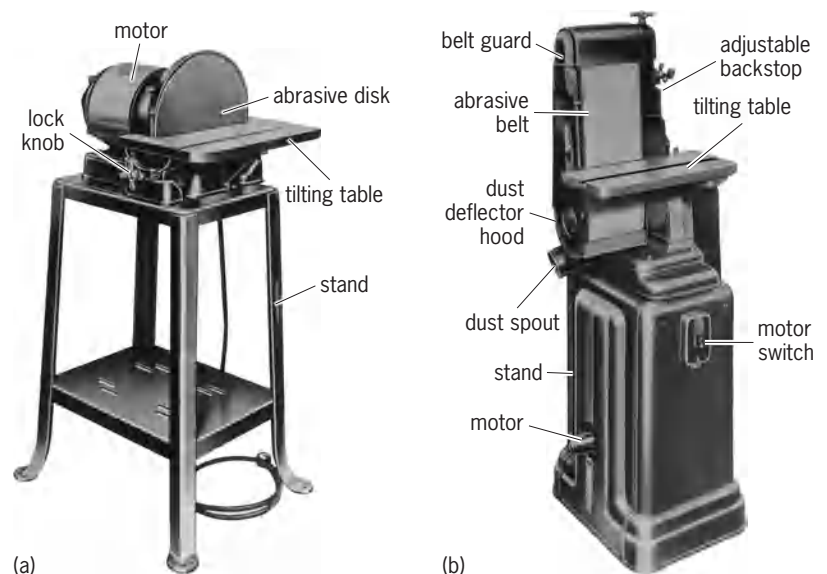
Types of power sander: (a) disk; (b) belt. (Delta International Machinery Corp., Pittsburgh)
